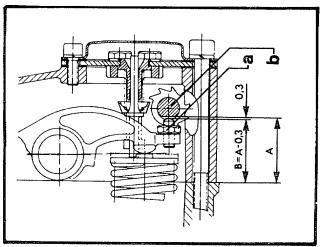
Engine Compression Adjustment Tolerances
